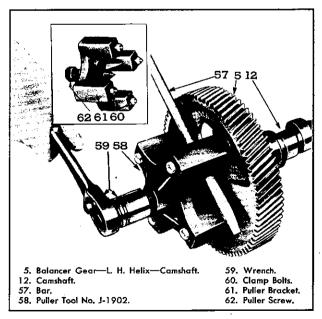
Removing Camshaft and Balancer Shaft Gears with Tool J-1902.
